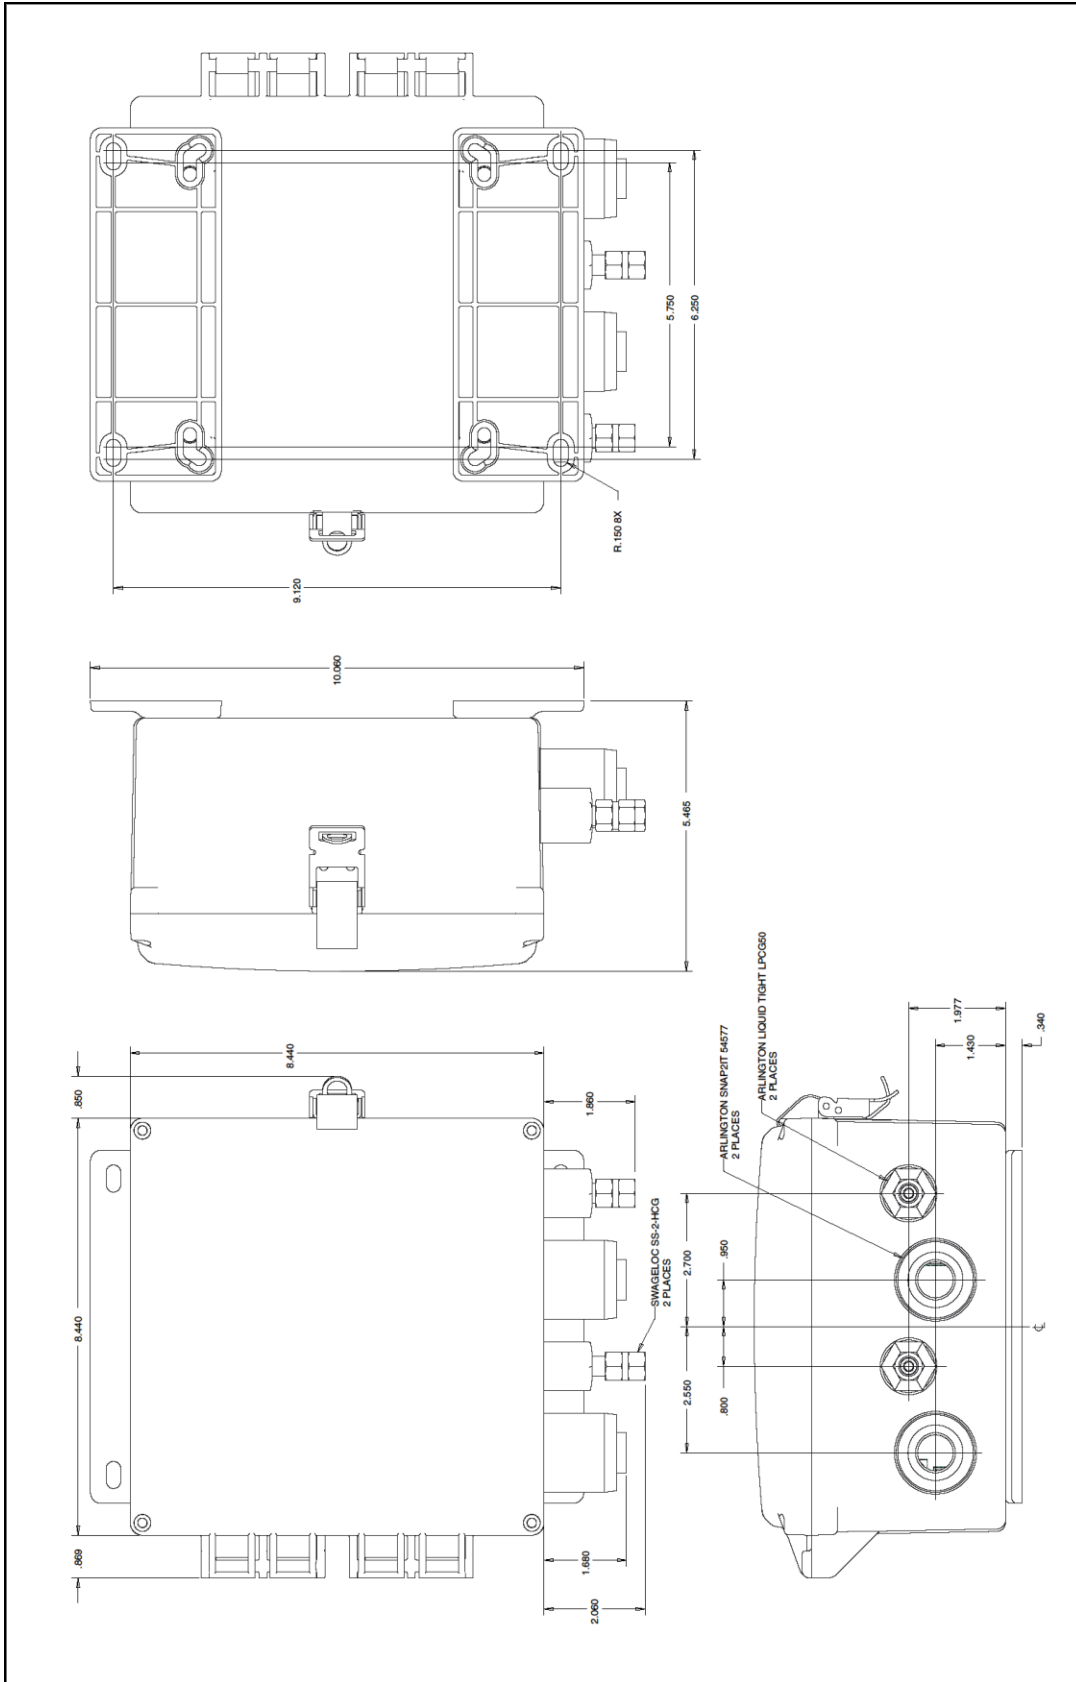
GPA-2000B MECHANICAL DRAWING (WITH MOUNTING FLANGES)
